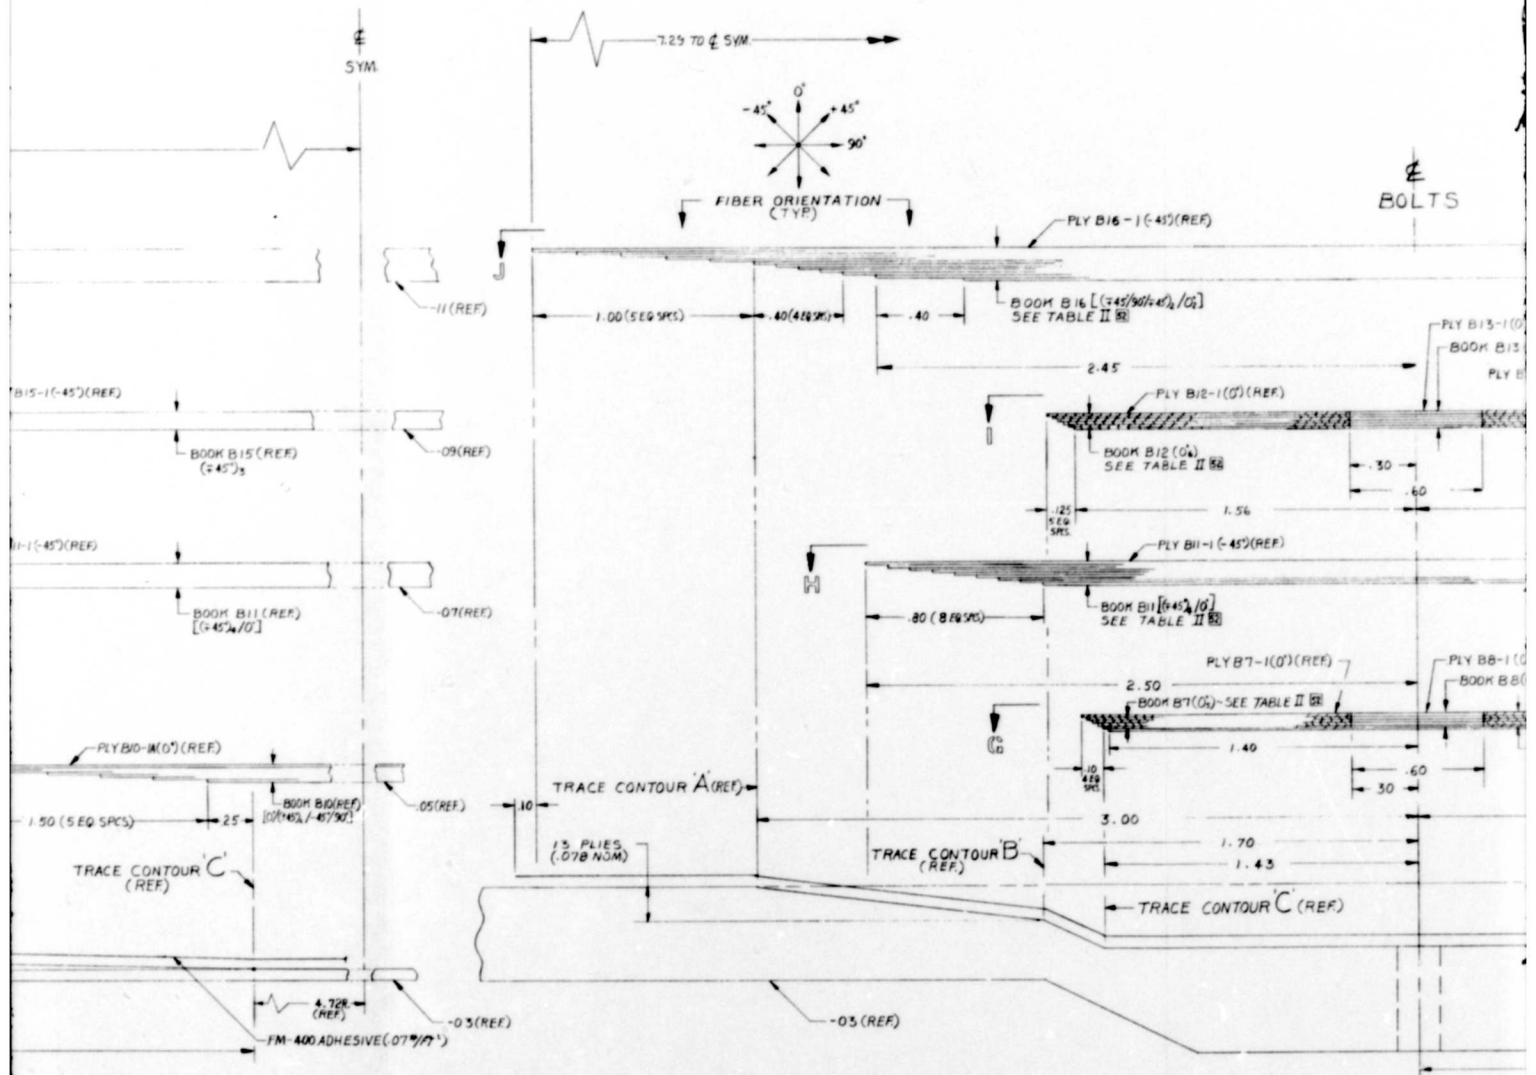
Panel Five Repair Drawing (Sheet 3 of 4)
